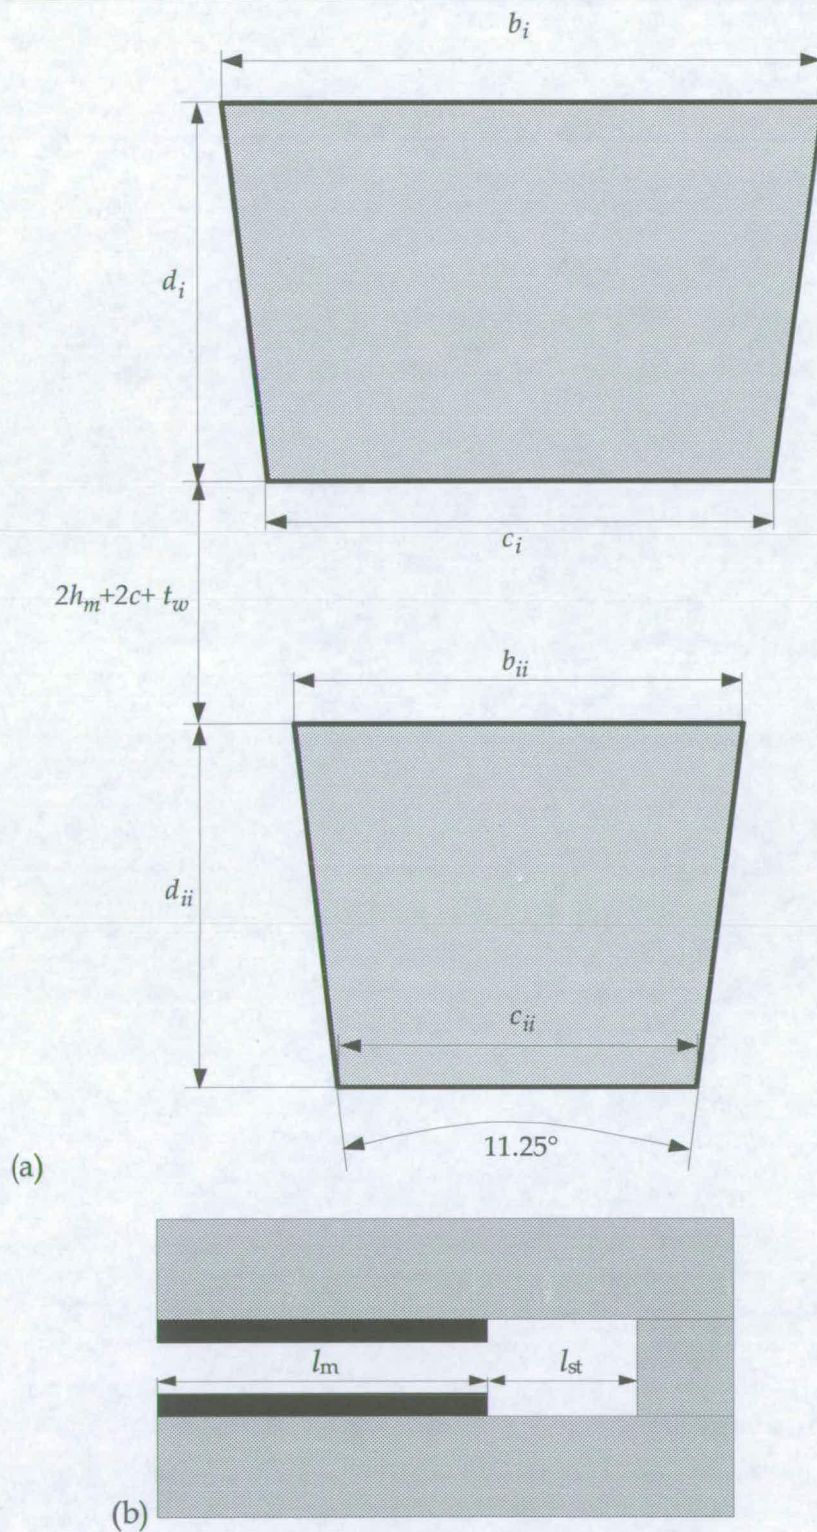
Steel rotor module dimensions: (a) Front view and (b) Side view
